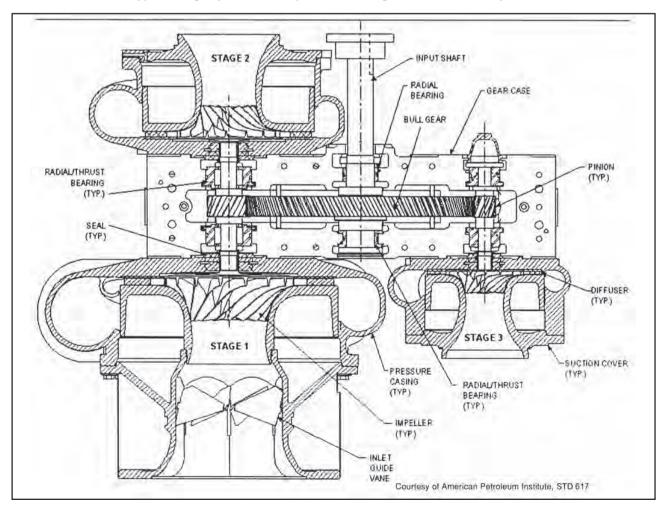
Typical Integrally Geared Compressor Arrangement Showing Nomenclature of Key Elements
